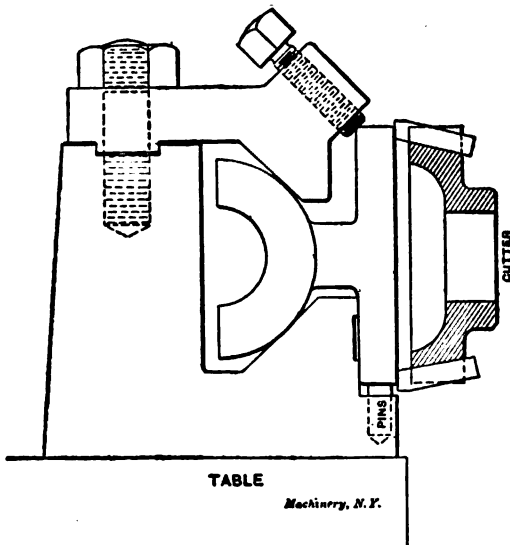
Alternative Method of Holding the Base when Milling the Lower Surface
